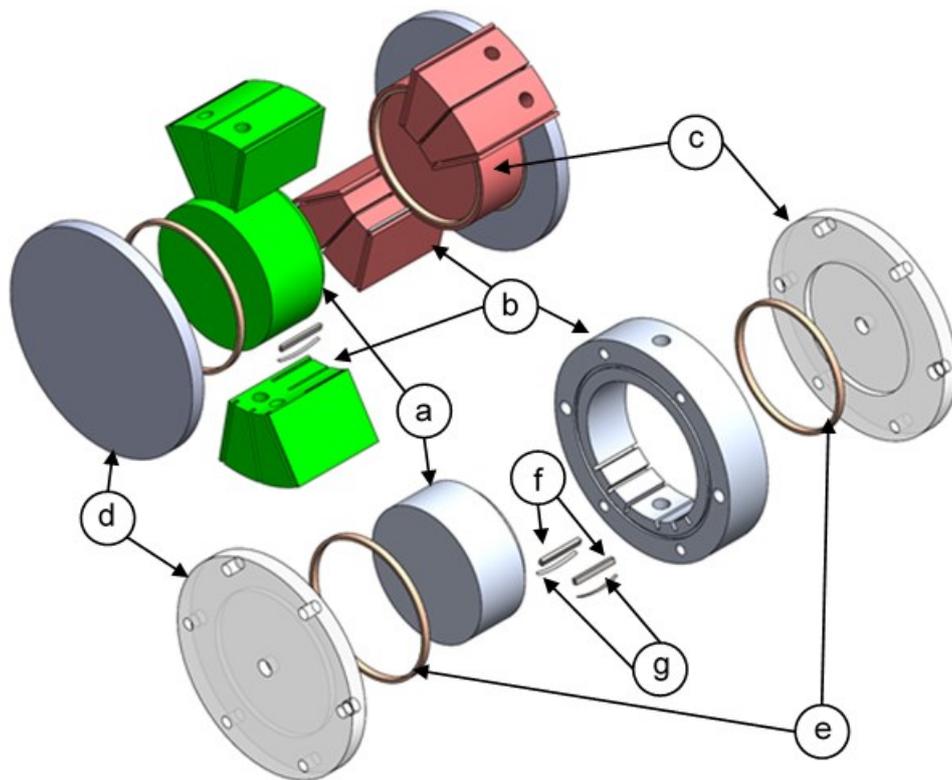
Exploded view of TRPE parts (in the left) and their analogous parts in the simplified test chamber (in the right).
